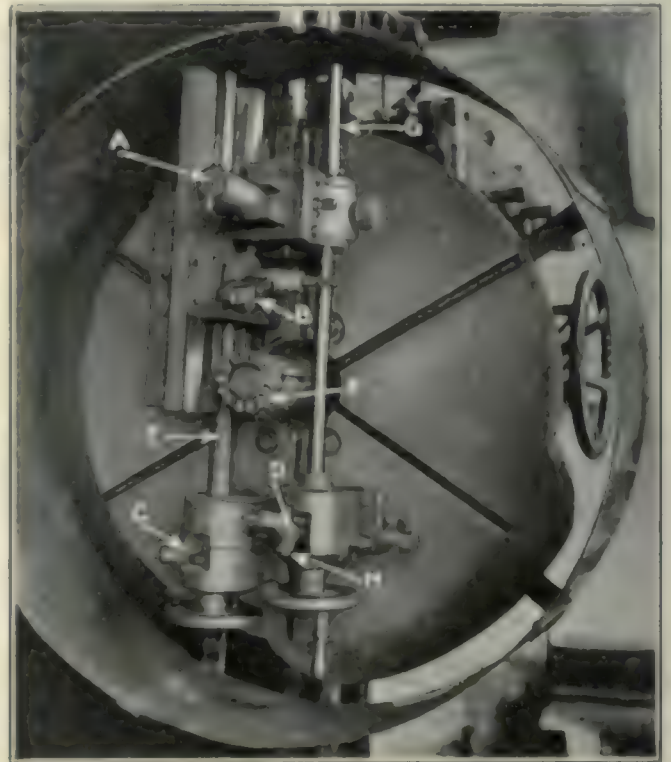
ATTACHMENT ON BORING MACHINE FACEPLATE
